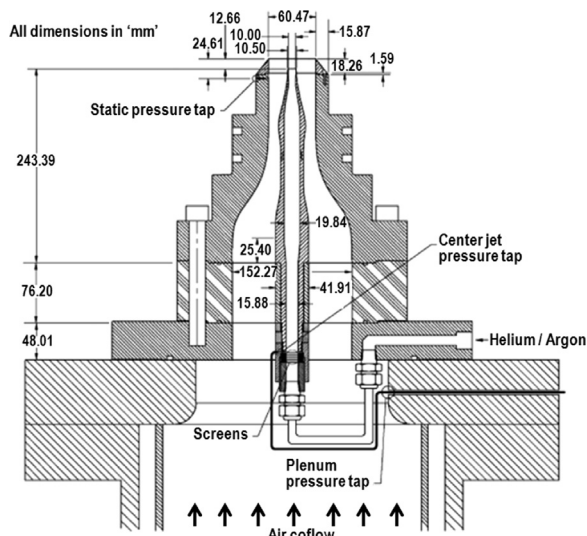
Coaxial jet-nozzle assembly (reproduced from Ref. [9]).
